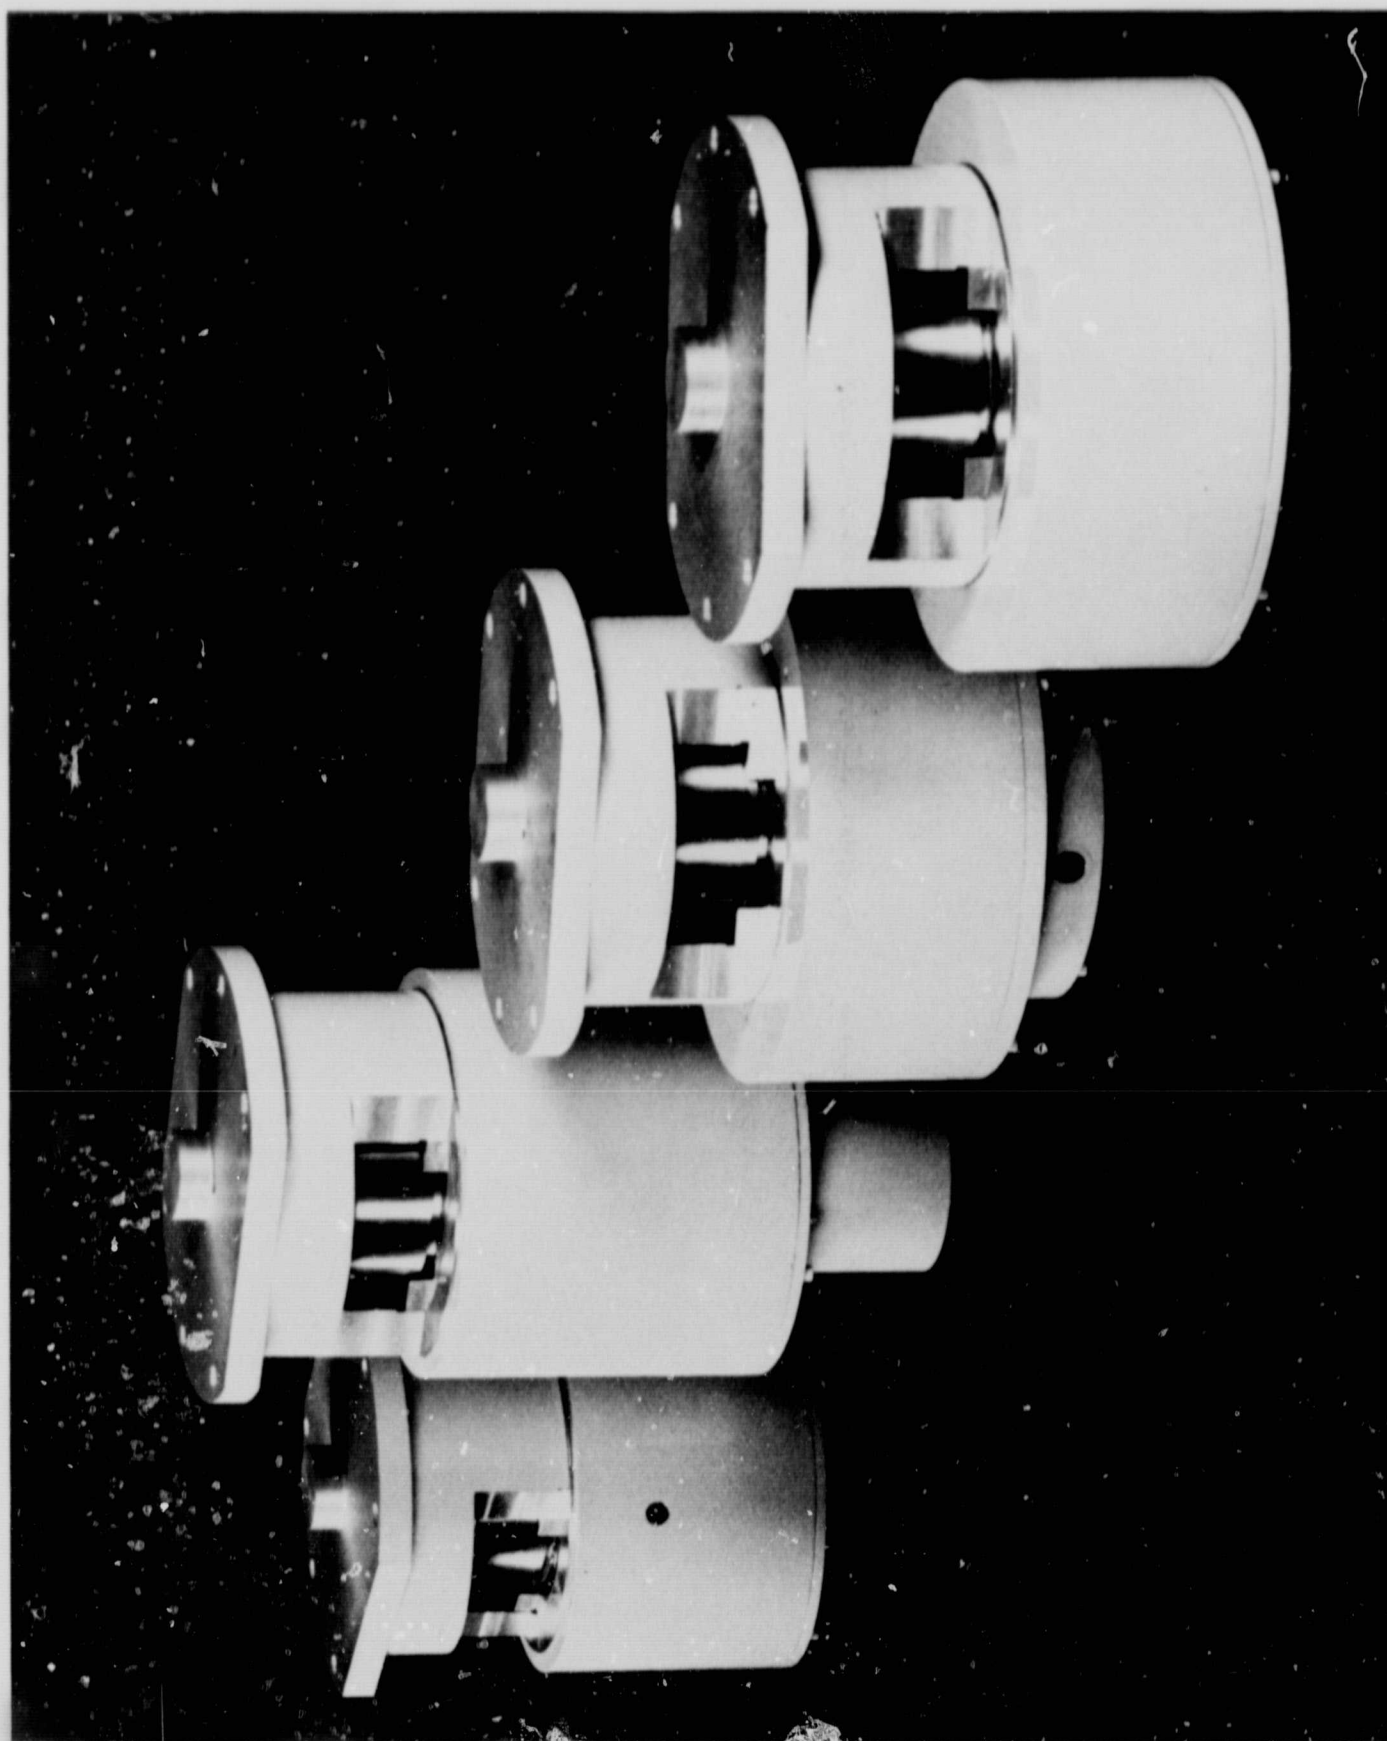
Roll-Axis Drive and Data Assemblies.
